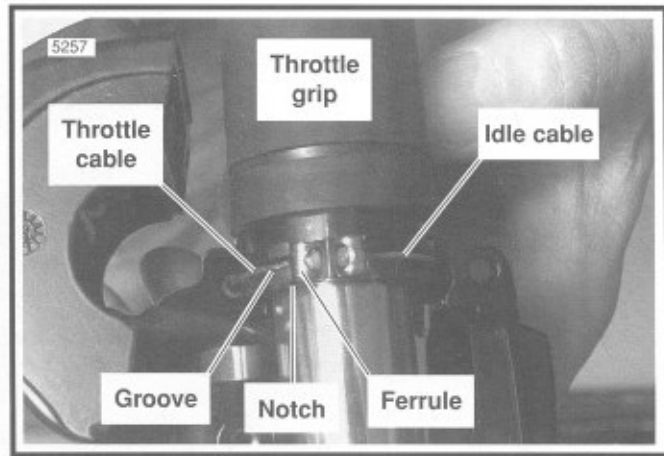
Install Throttle/Idle Control Cables on Throttle Control Grip
